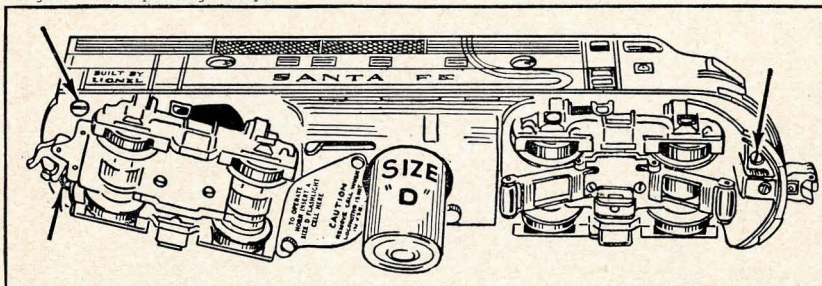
Bottom View of No. 2333 Diesel Locomotive
